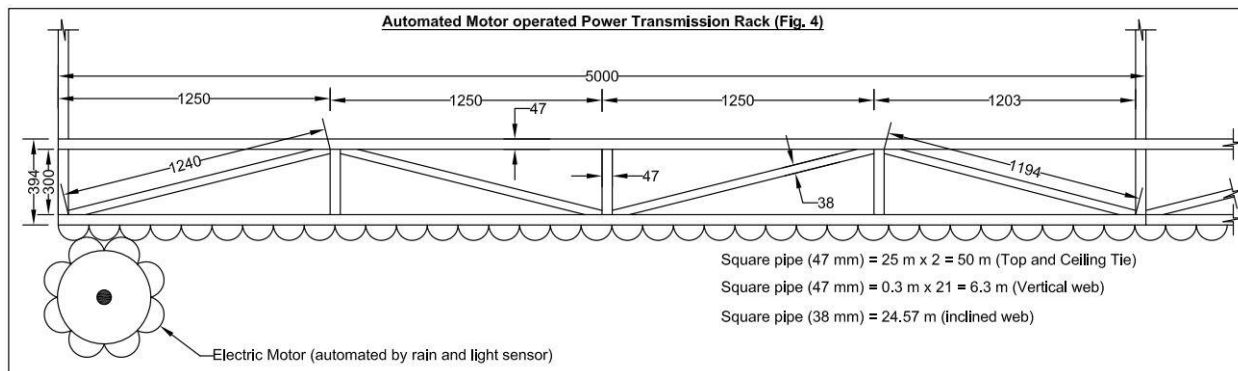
Motorized retractable gear mechanism to move the rainout shelter to and fro
